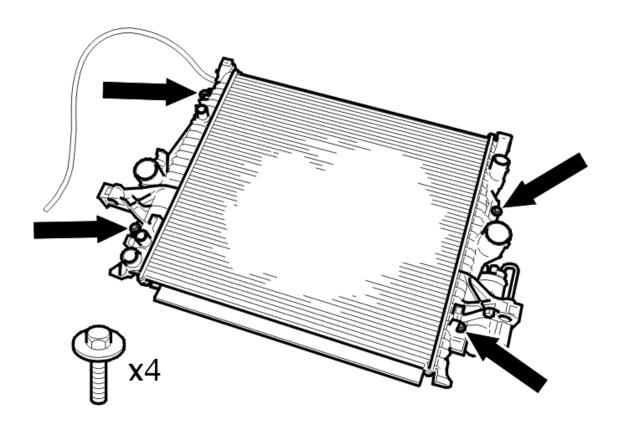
Identifying The Air Conditioning Aggregate Screws Courtesy of VOLVO CARS CORPORATION
